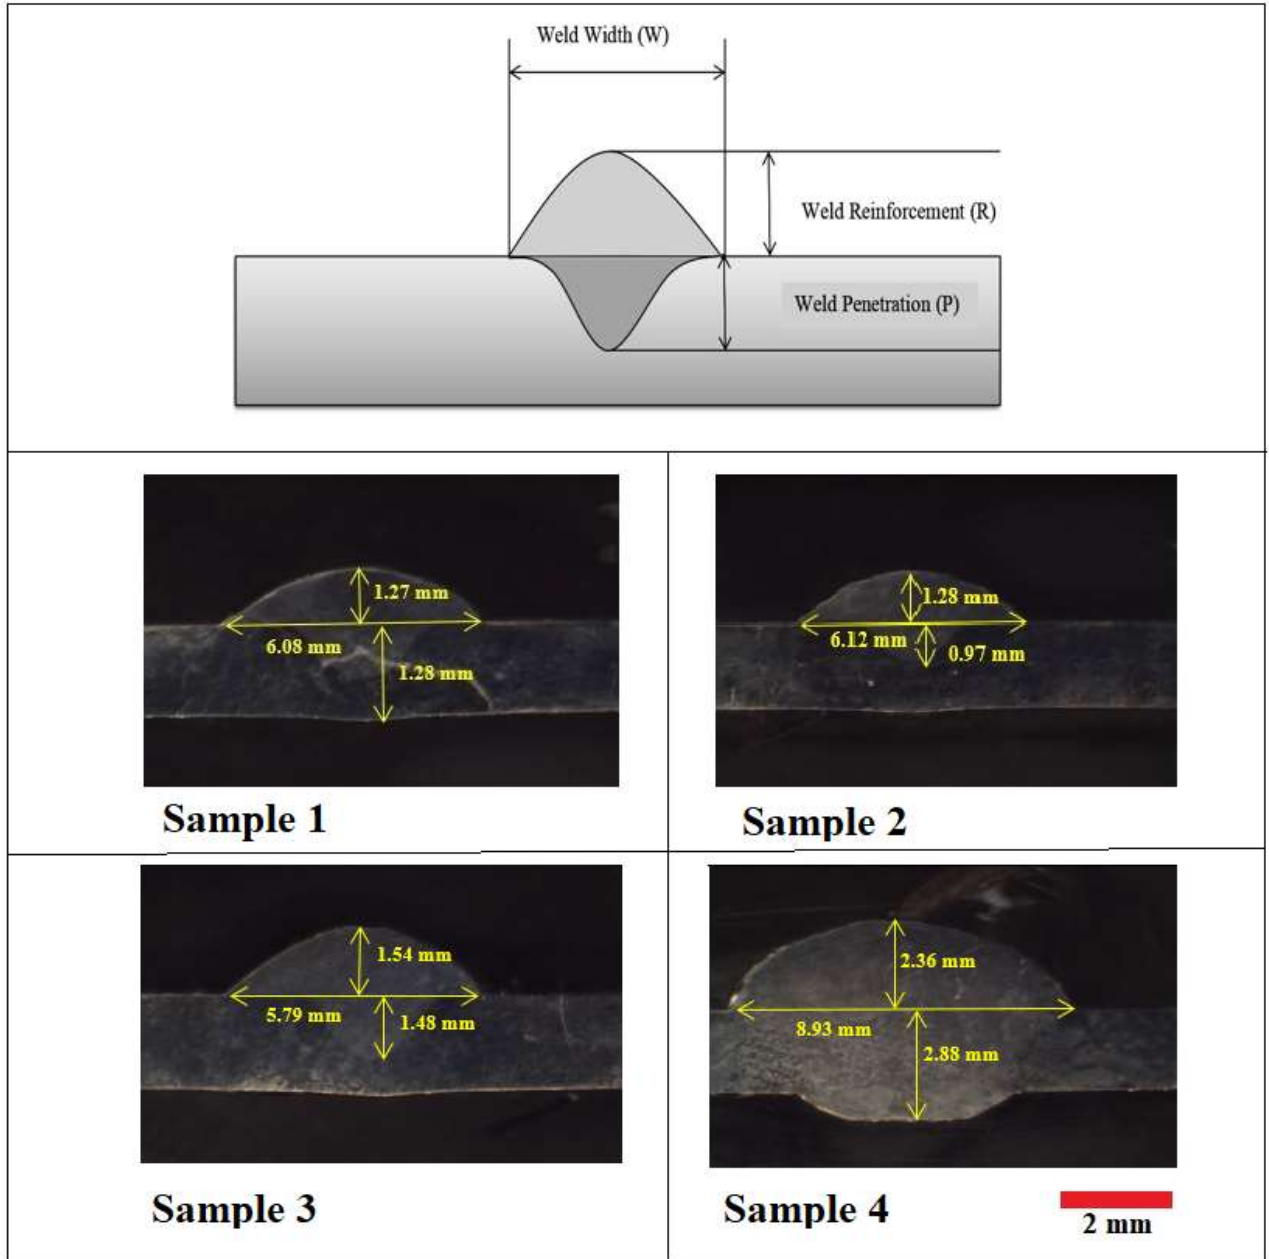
Macro-images of CMT weld bead samples S1 to S4
